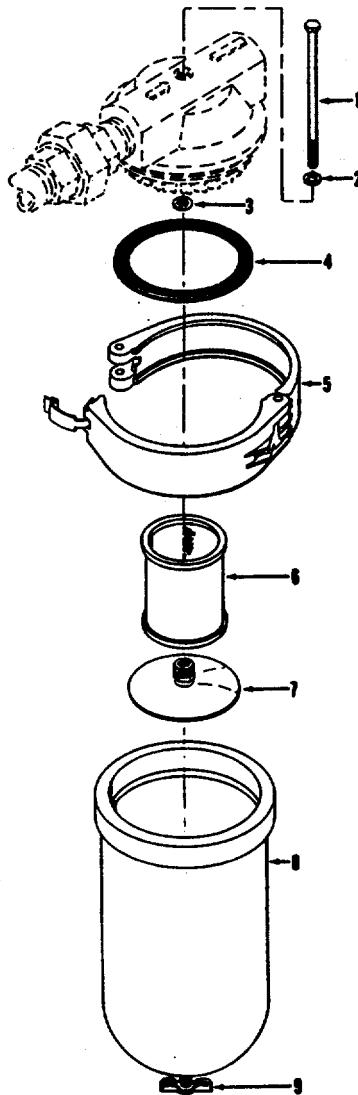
Air Starting Filter, Disassembly and Reassembly.
